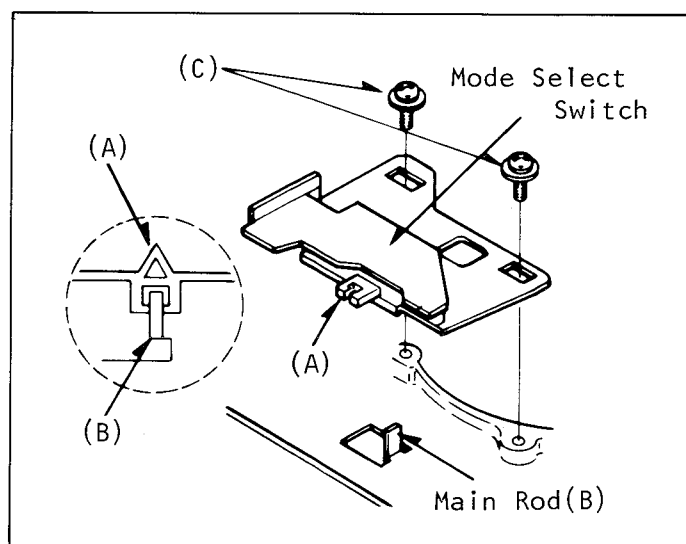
Adjustment of Cam Gear and Mode Select Switch - (12)
